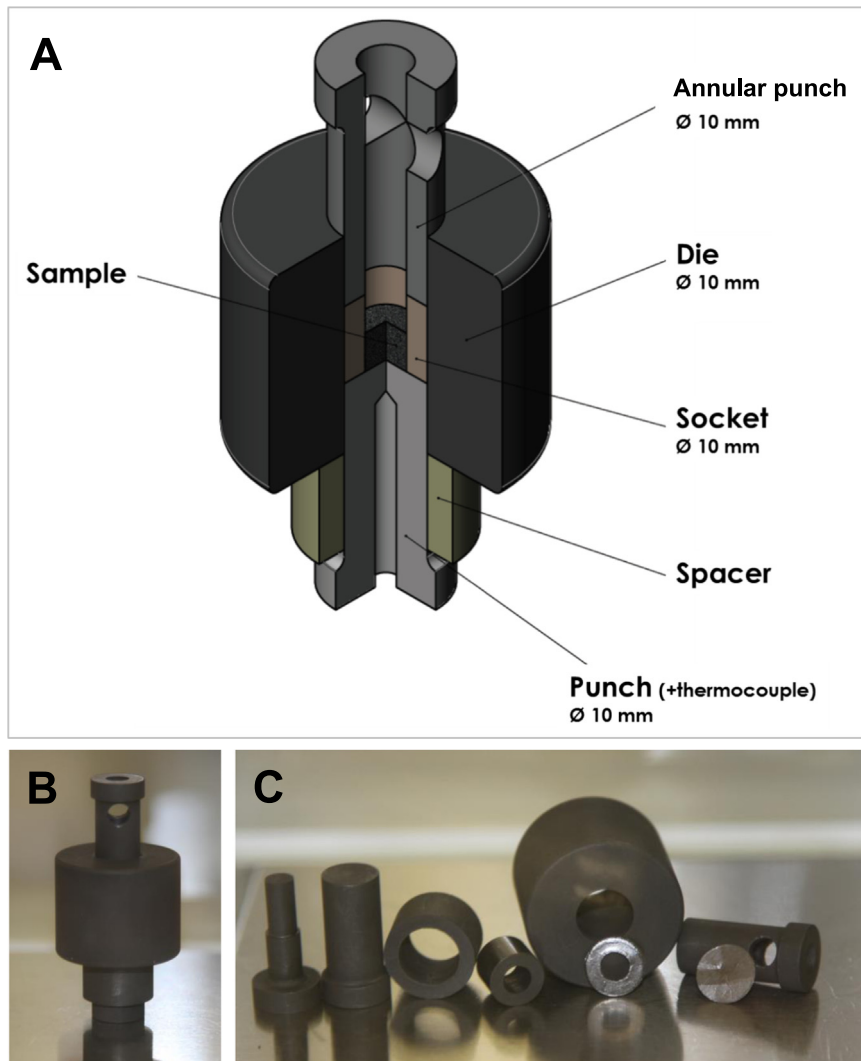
Technical drawing of the SPS die and punches modification for CTR purposes (A), photography of the assembled (B) and disassembled (C) set-up.
